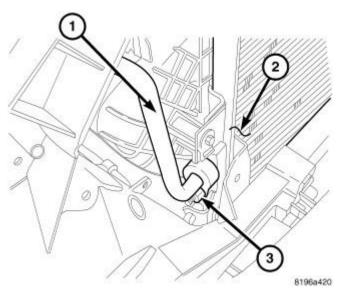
Identifying Discharge Line To Condenser Diesel Courtesy of CHRYSLER LLC
